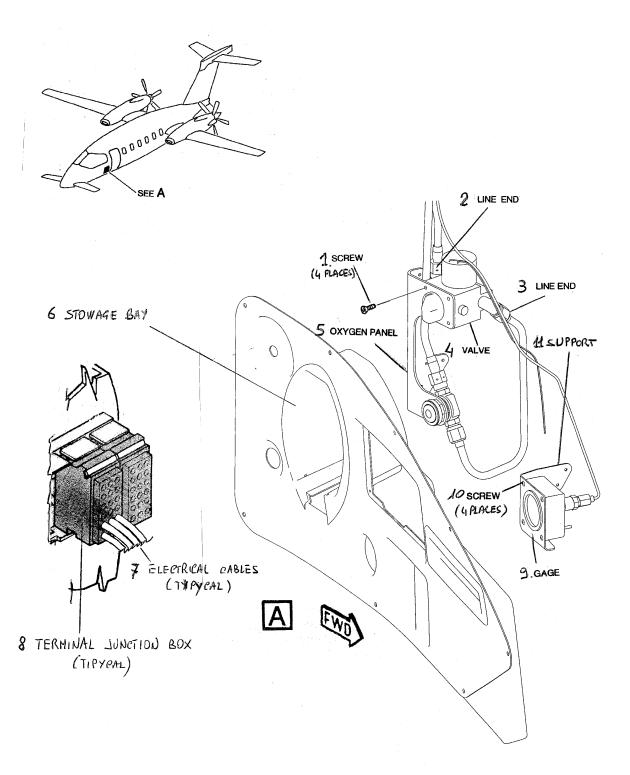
Three Position Valve and Oxygen Gauge - Removal/Installation
